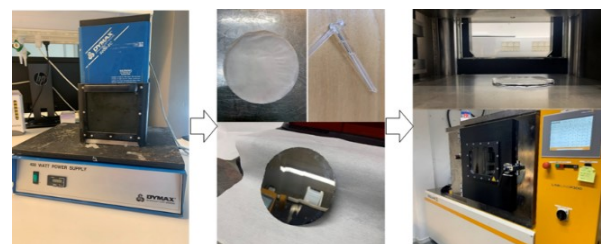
Bonding process starts with UV using Dymax 5000-EC laser. A sandwich of the chip, lid foil and Nickel shim and Teflon sheets are then placed inside Collin P300 SV hot-embossing machine to finish the bonding.
